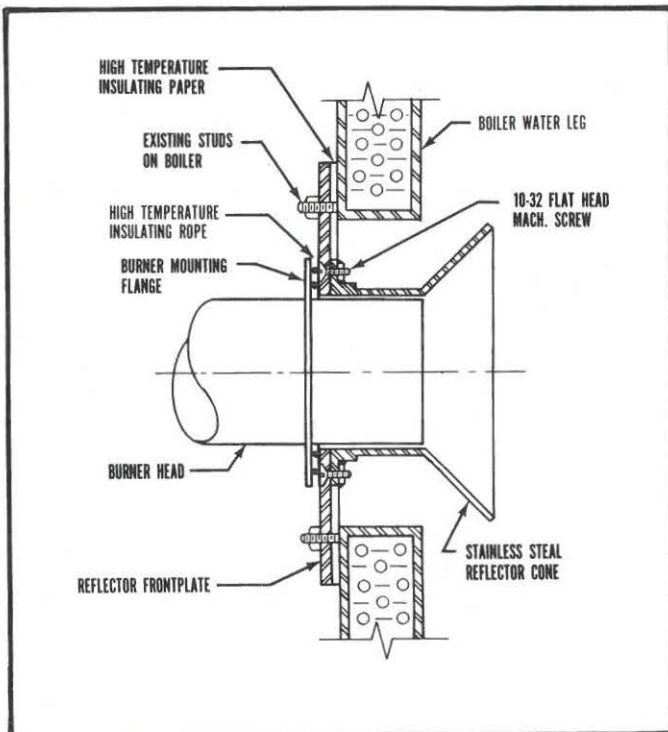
REFLECTOR FRONTPLATE INSTALLATION BOILER WITH SINGLE FIRING DOOR
